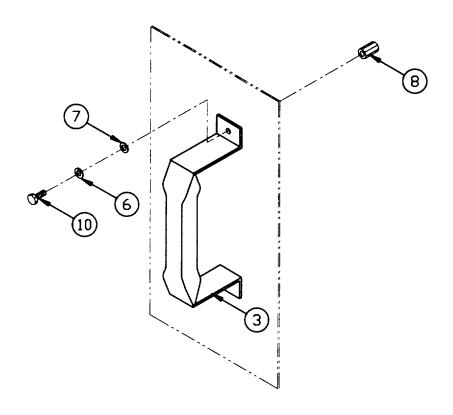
AFT END ASSEMBLY (SHEET 1 OF 5)
